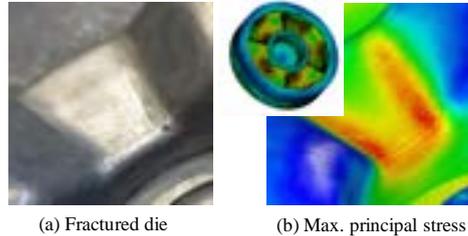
Detailed view of the fractured die and the maximum principal stress
